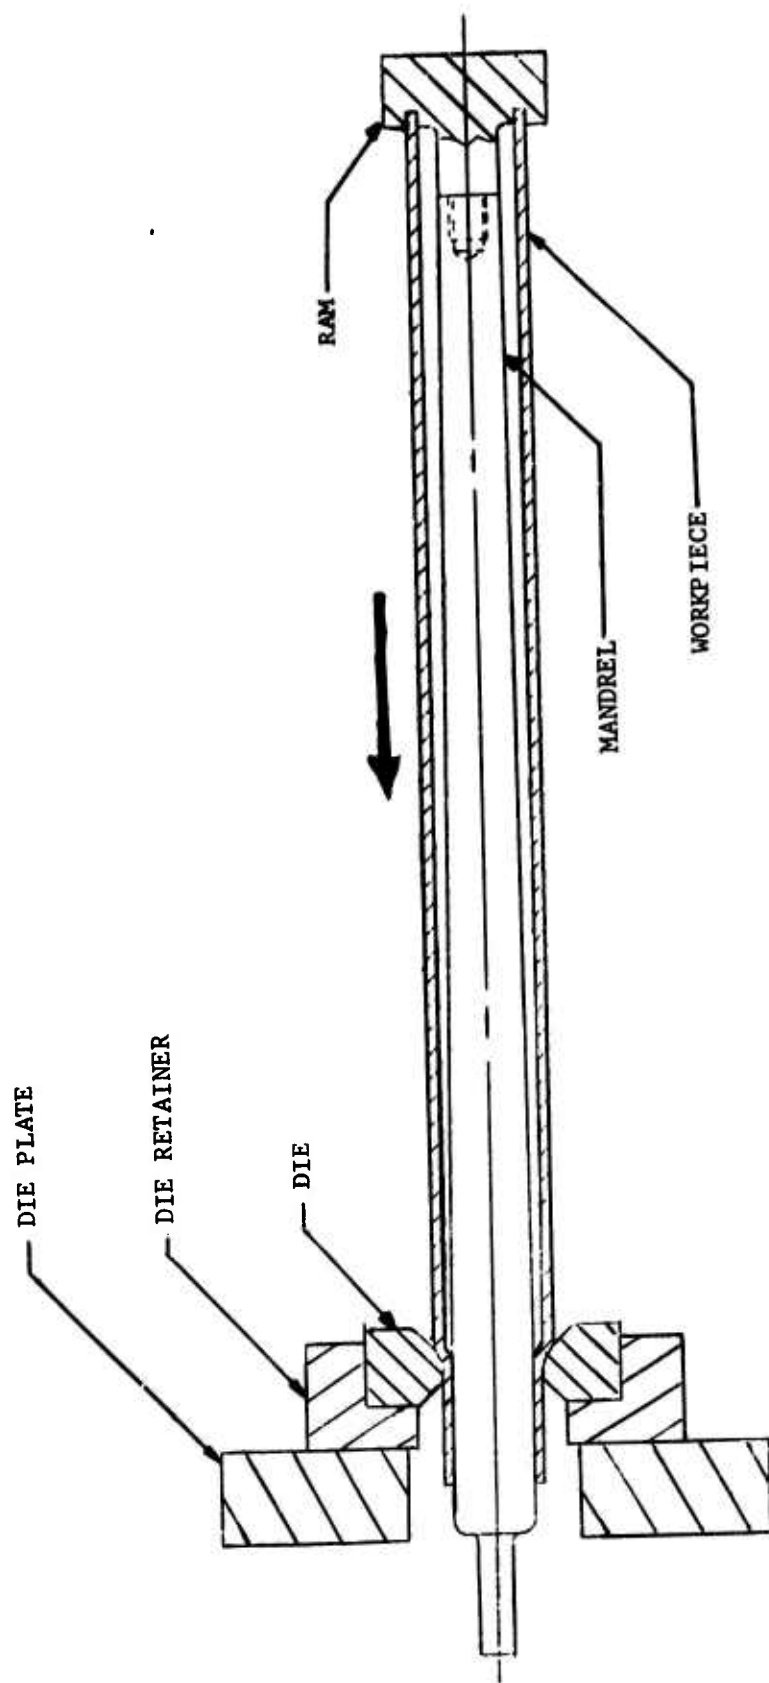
Tooling Arrangement for Wall Tapering With Rigid Die.
